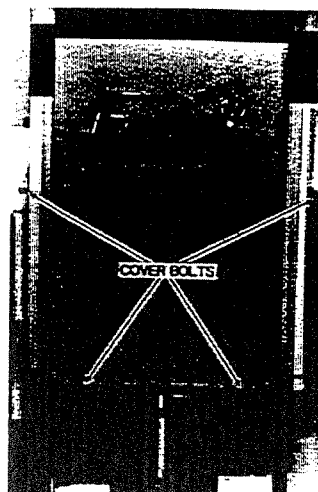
7 REMOVE MAIN Z AXIS COVER
